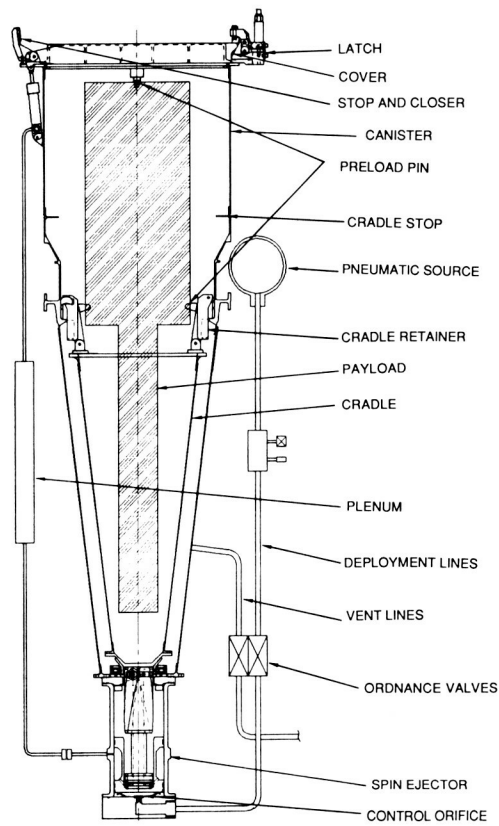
CANISTER ASSEMBLY SYSTEM
